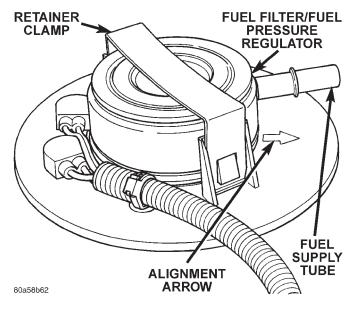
Fuel Filter/Fuel Pressure Regulator
